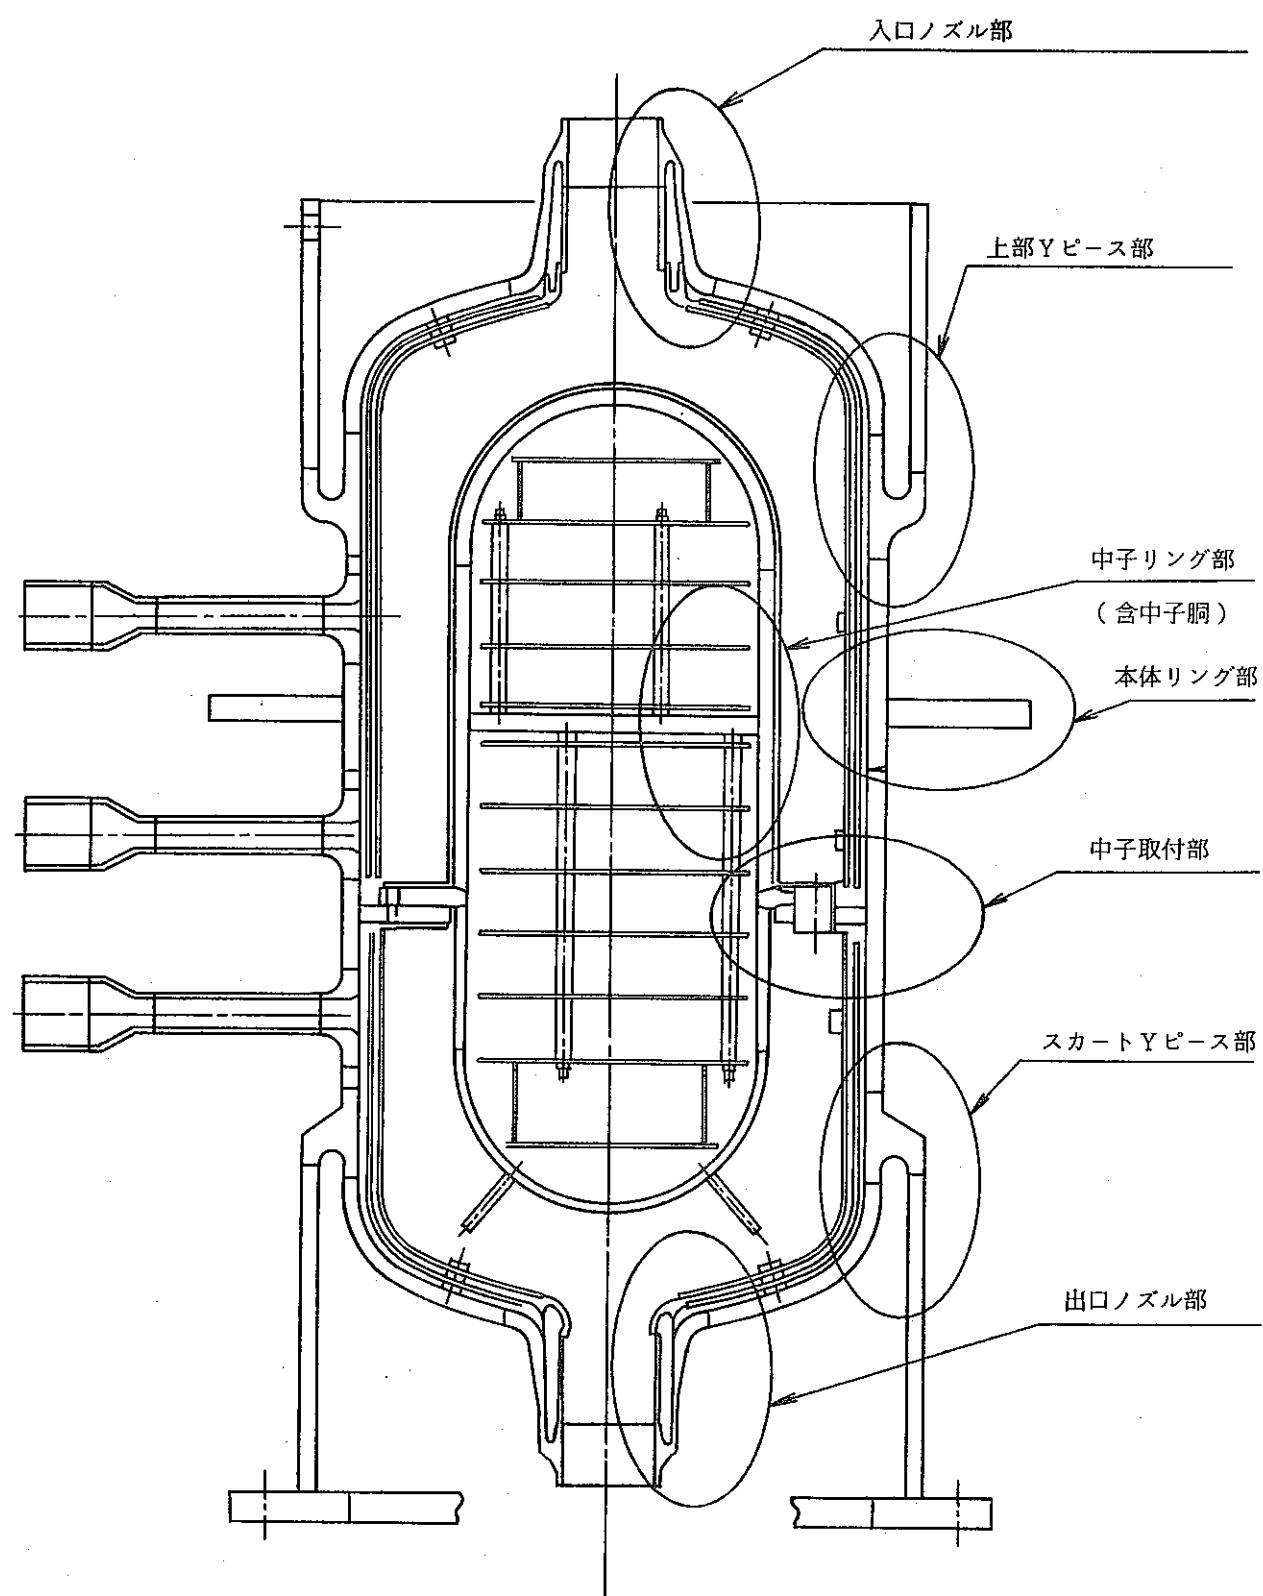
Configuration of Welded Vessel Model
